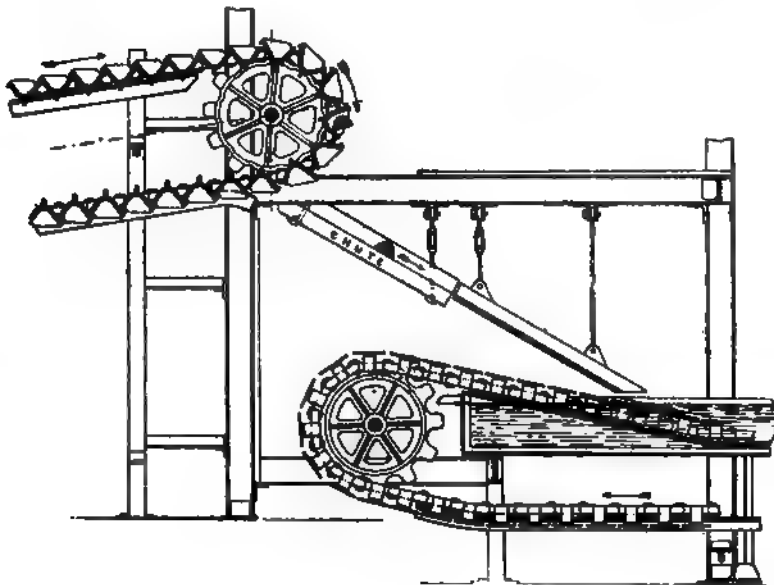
Removal of Pigs from Casting to Cooling Conveyor.
